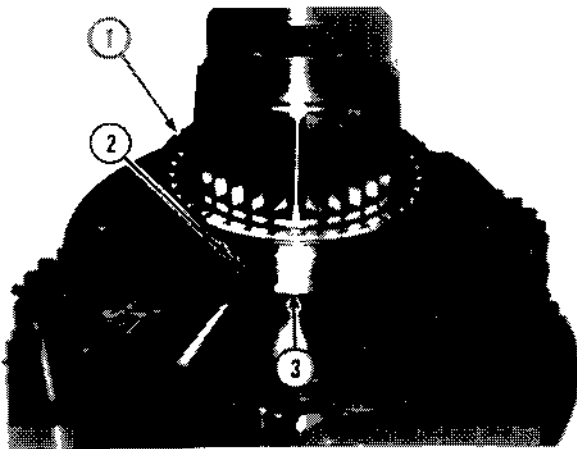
INTERMEDIATE BEARING INSTALLED
